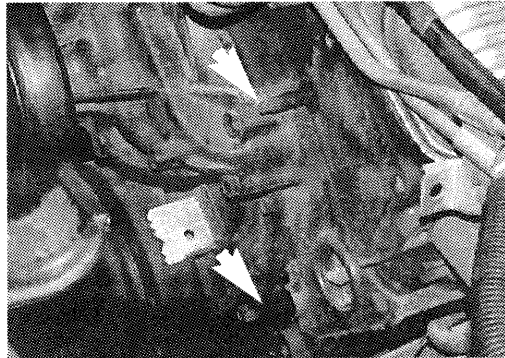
/ Location of factory P/S bracket mounting studs [View from driver's front]
